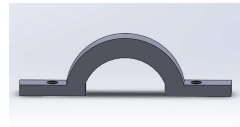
Solidworks CAD of the block to fix the falcon to the table
